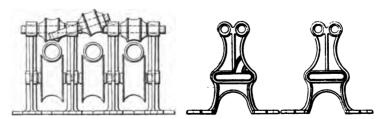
Pipe and Wire Carriers and Concrete Foundations. The Buffalo Railway Supply Company.
